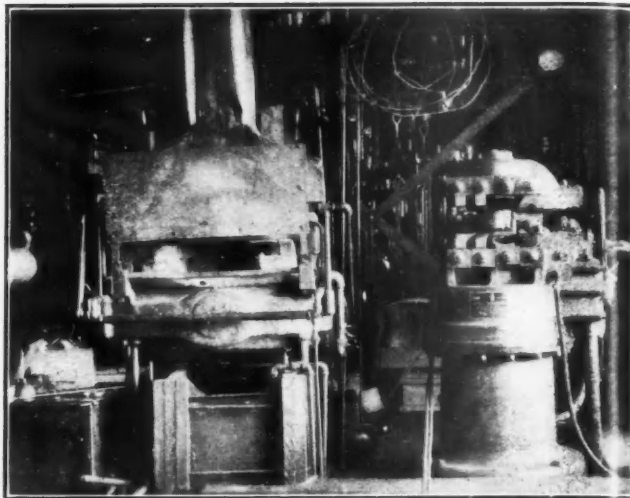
Oil-burning Furnace for heating drill-steels and pneumatic sharpener, on drill boat.
